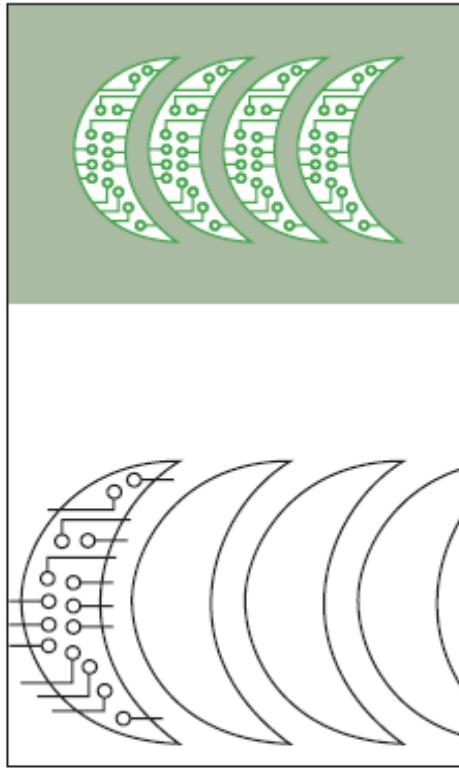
Steering-column sensors, having shapes similar to that of a crescent moon, would present significant handling problems, but multiple images can be assembled in a single rectangular board.
